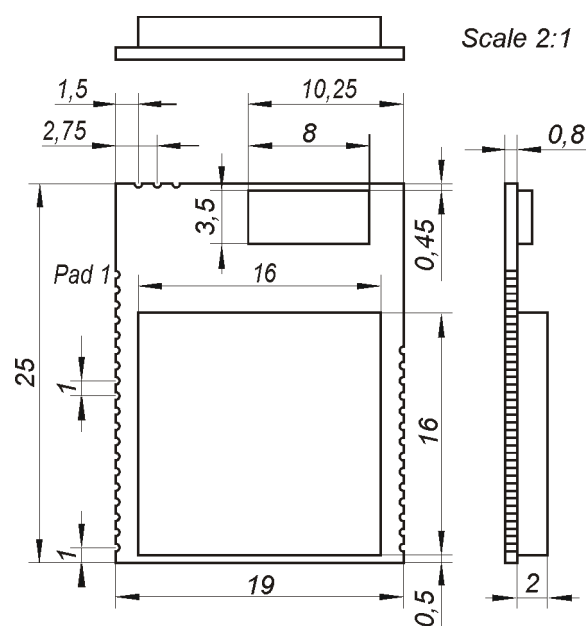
Dimensions with metal shielding (Enhanced EMI protection)
